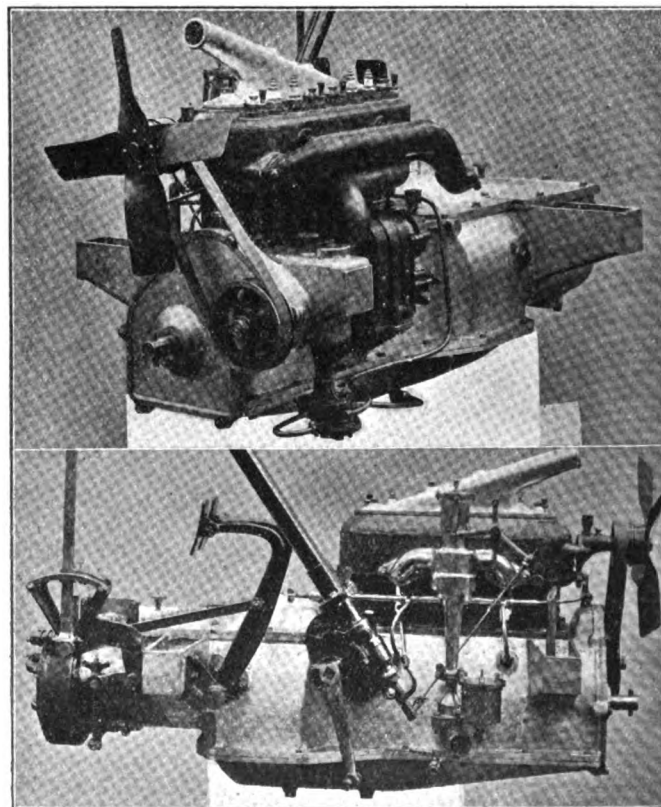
Two Views of Argyll Combined Engine and Gear-Box.
